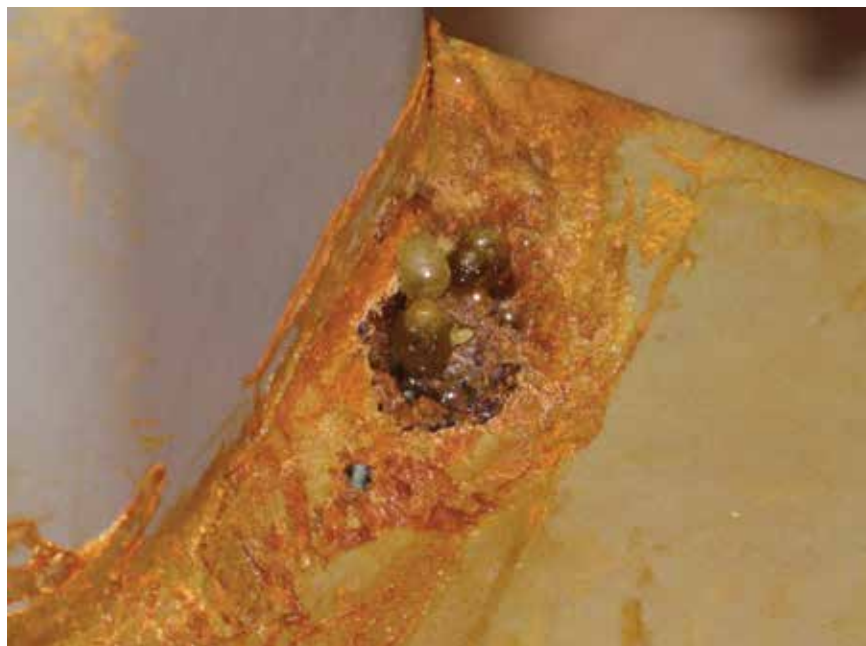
Leakage testing indicated that "new corrosion" formed. This was made of crusted bubbles with underlying fluid.
